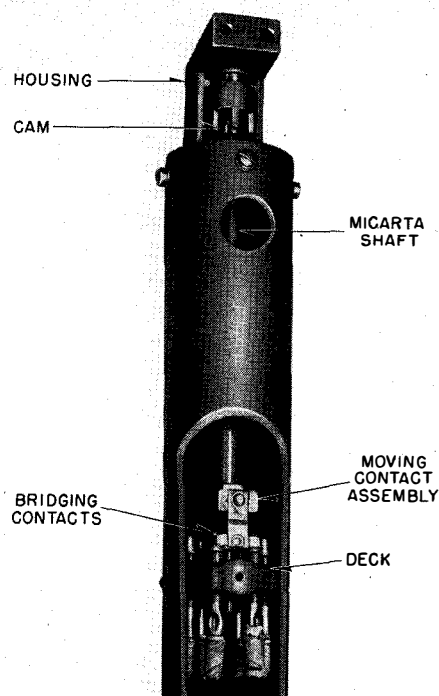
Cutaway View of Single Deck, 100-Ampere, WSB Tap Changer.
